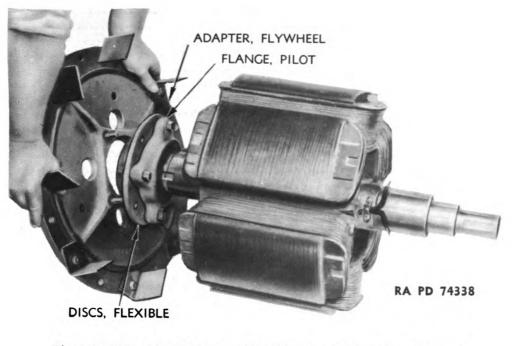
Flexible Coupling Flywheel Adapter Removal
